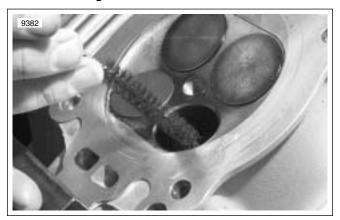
Valve Guide Cleaning Brush (HD-34751)
